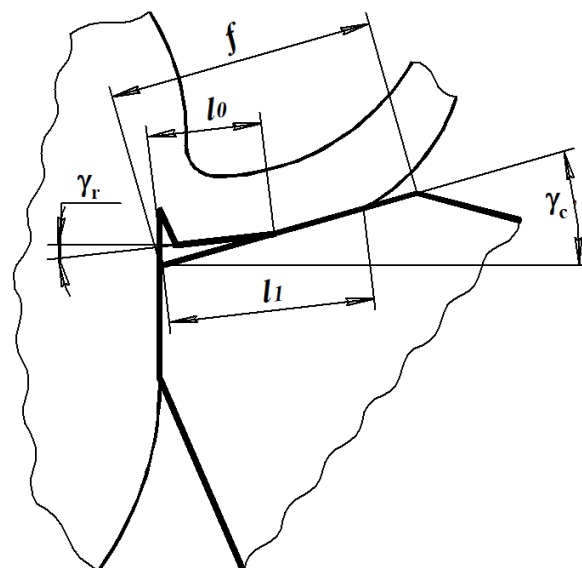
The shape of the actual cutting blade when cutting with a large chamfer
